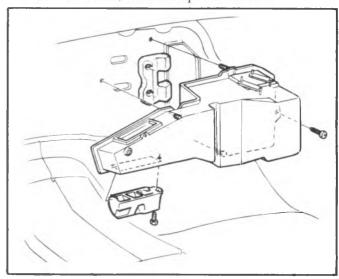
A-8--Heater Distributor Assembly--C-K Models
